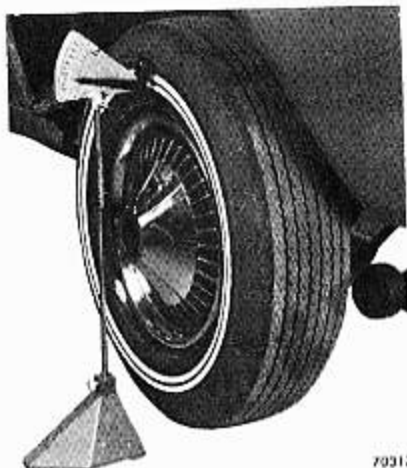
Wheel Run-out Gauge Position When Used to Check Upper Ball Joint Looseness
